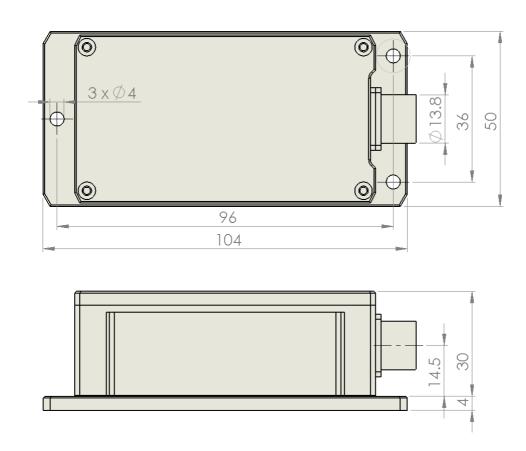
TransducerM TM500-x Mechanical Drawing Unit: mm
